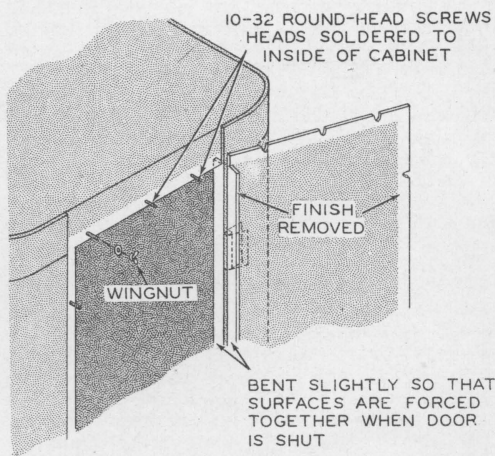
Scheme employed to insure metal-to-metal contact between the door and rear edges of the enclosed rack.
